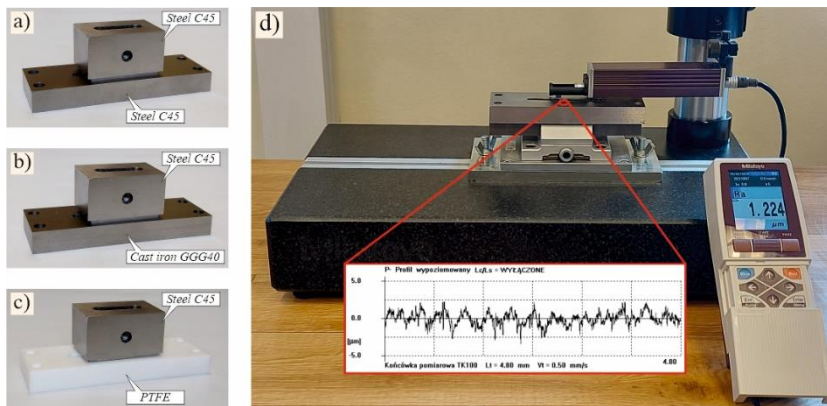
Photos of specimens prepared for testing and roughness measurement stand: (a) steel–steel, (b) steel–cast iron, (c) steel–PTFE and (d) profilometer Mitutoyo SurfTest SJ-210
